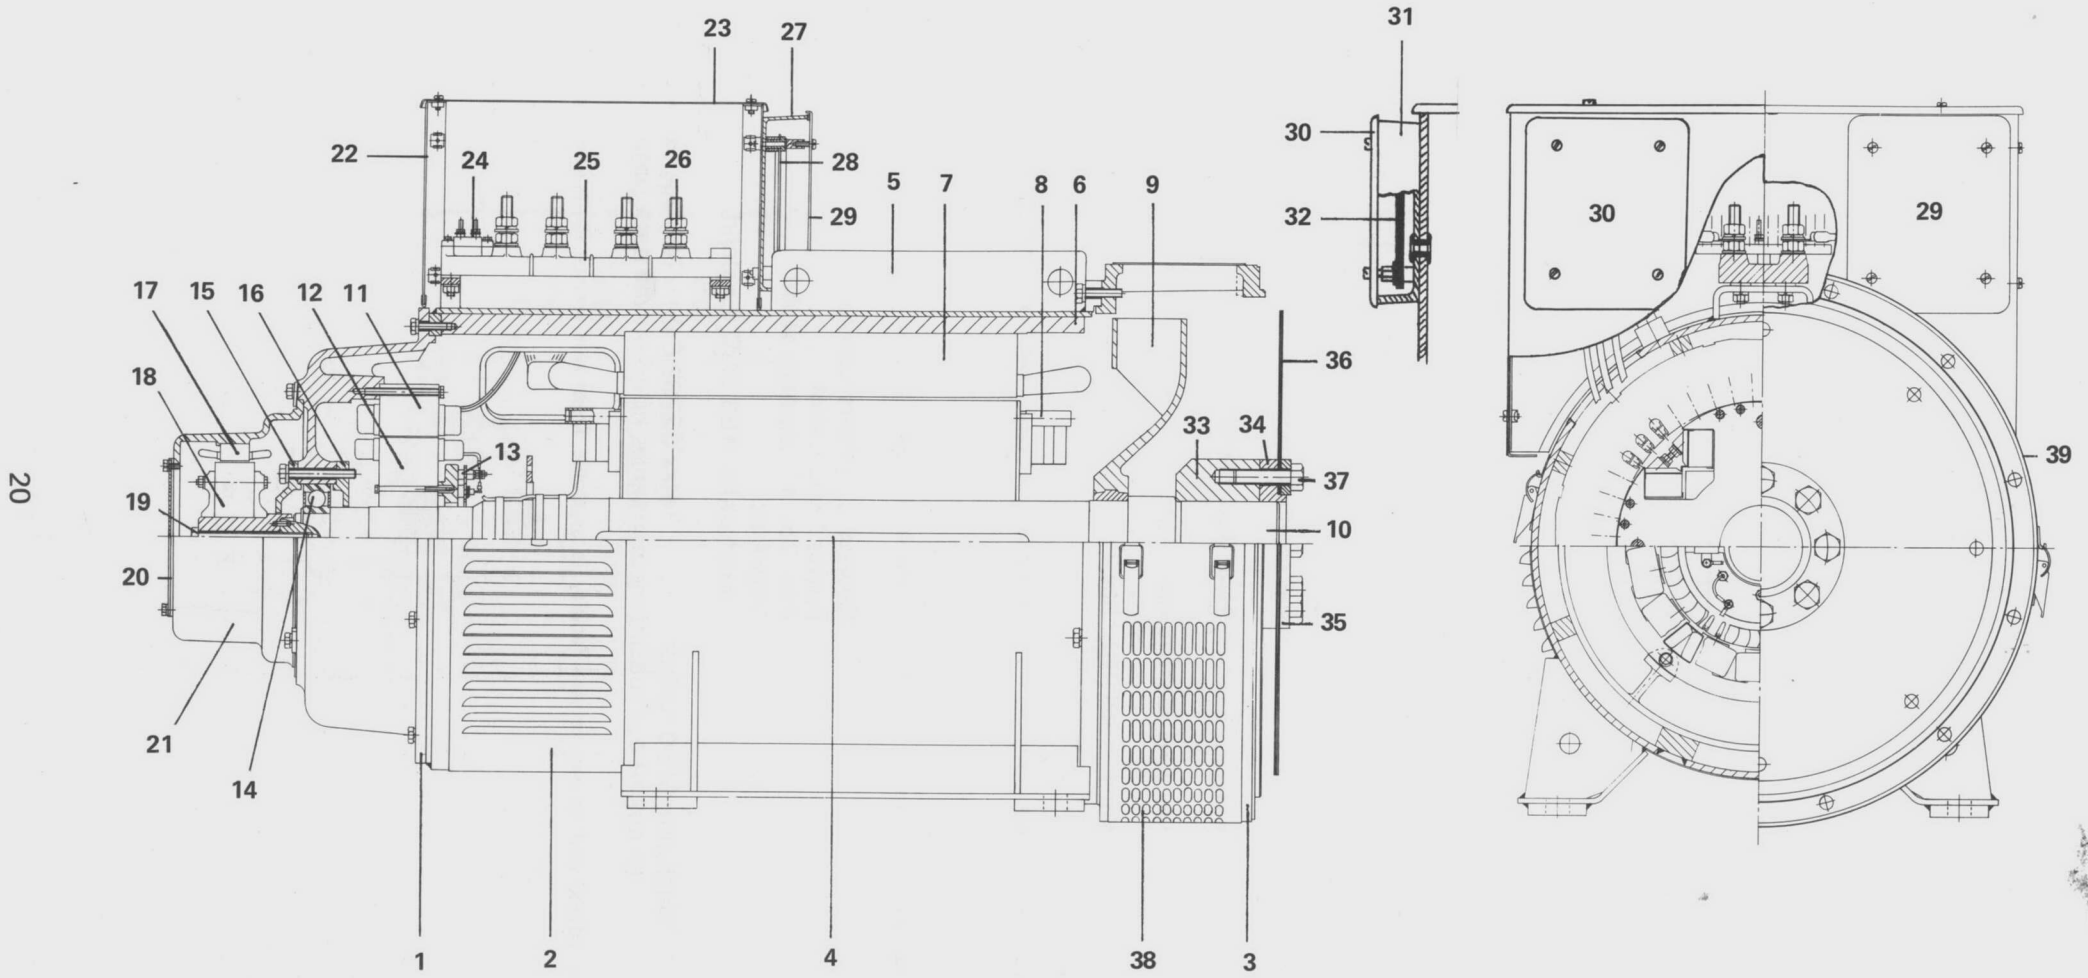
SC2 - 3 SINGLE BEARING MACHINES (OUTBOARD EXCITER)
